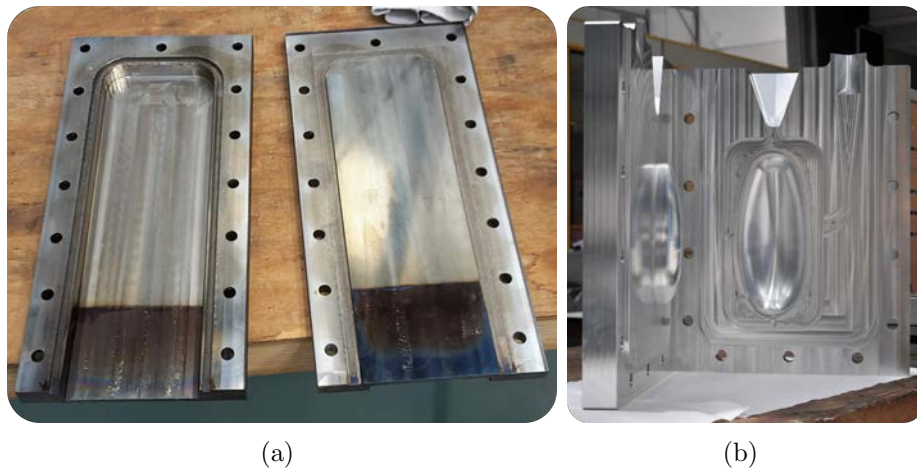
(a) Steel mould used to cast tensile and compressive specimens; (b) Aluminium mould used to cast externally pressured specimens
